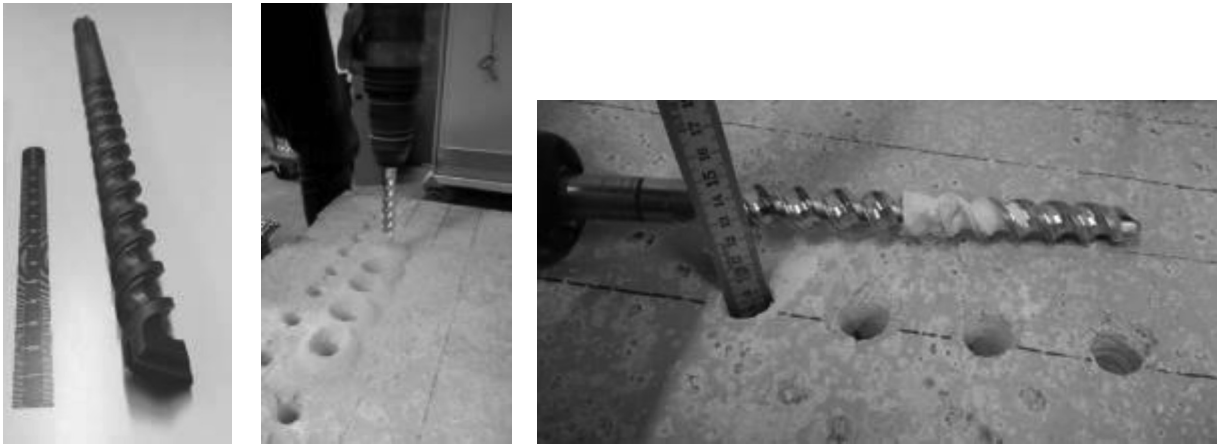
SG-3DP drill plate brazed on helical flute and percussion drilling test
